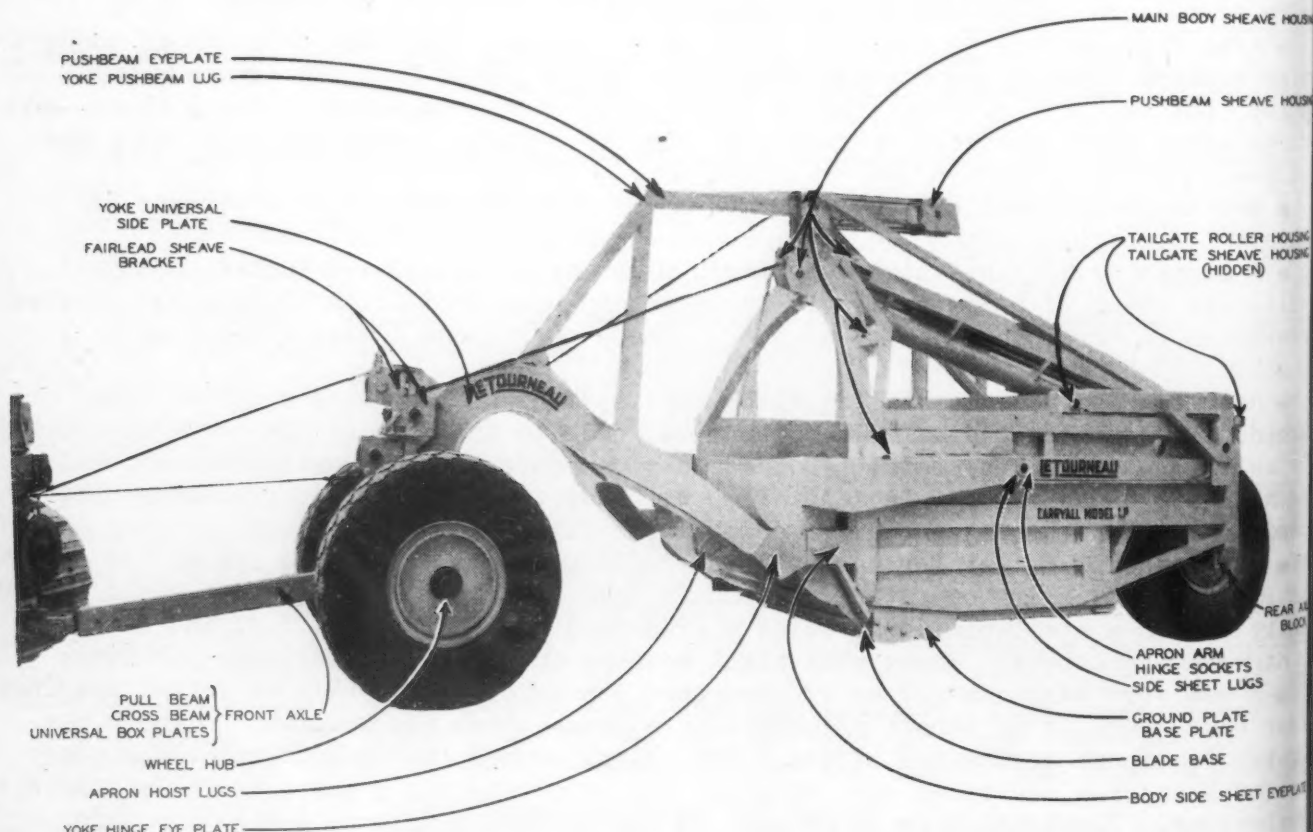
A large, all welded earth moving unit, showing the relatively few machined parts of the machine. Most of these parts were machined as parts or small substructures prior to the welding of the parts into the final structures.
